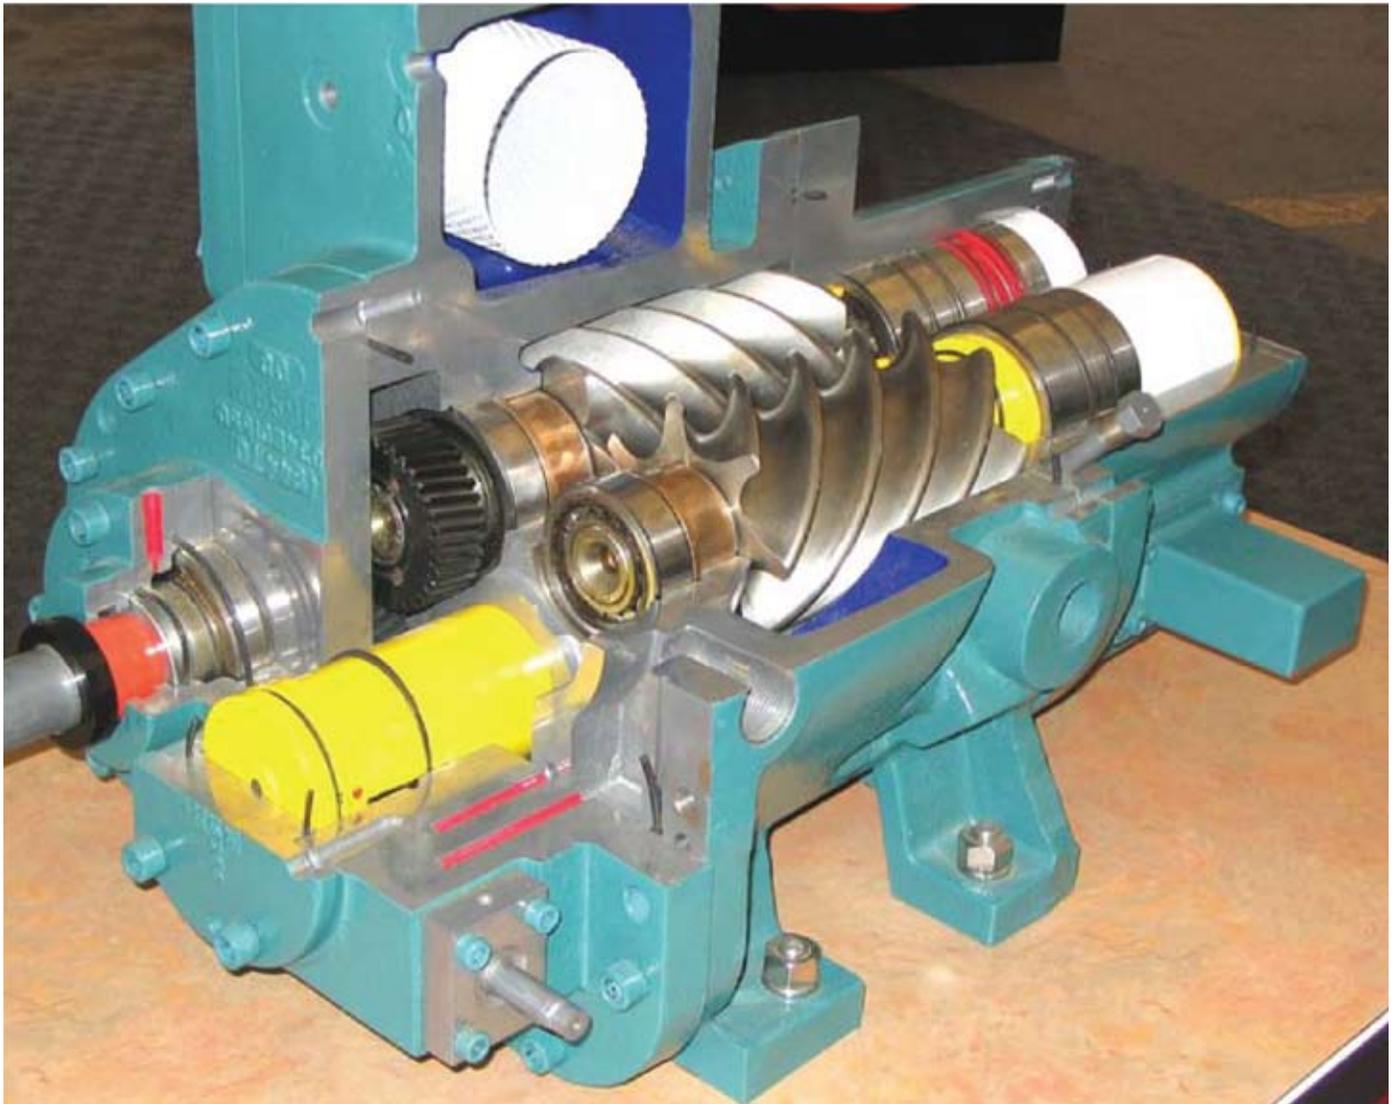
| Cutaway View of a Piston and Lube Rotor Set, including Timing Gear
